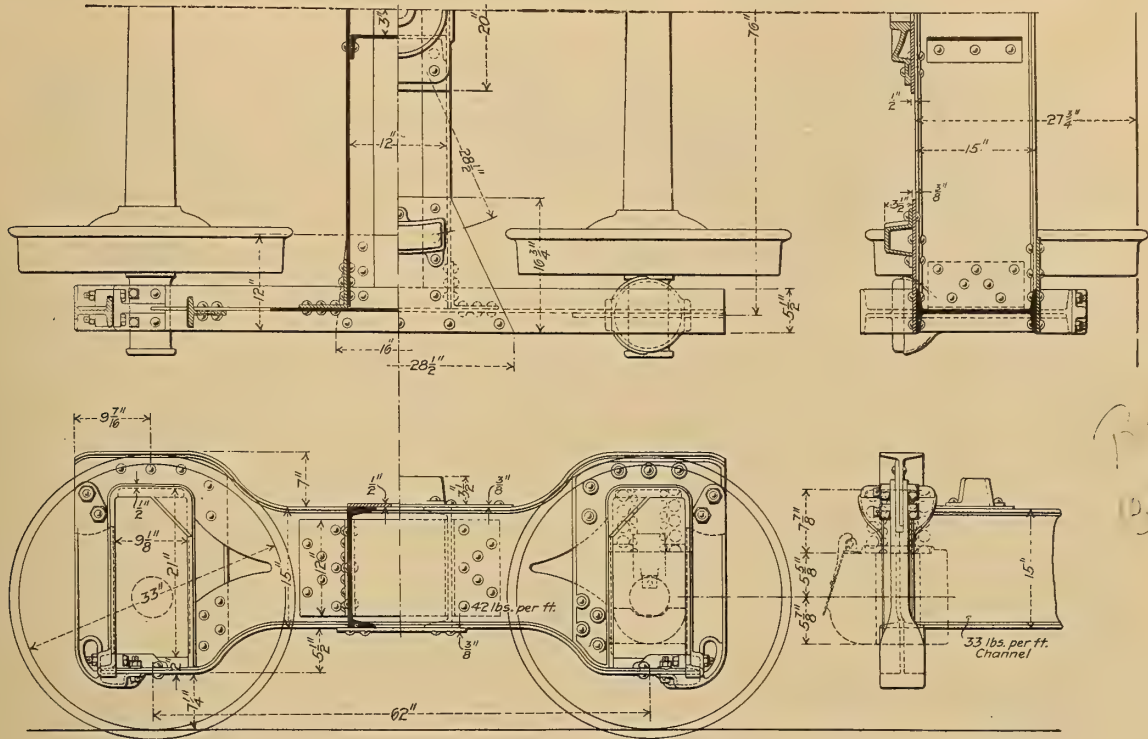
100,000-LB. DIAMOND ARCH BAR TRUCK. CAMBRIA & CO., MAKERS.
